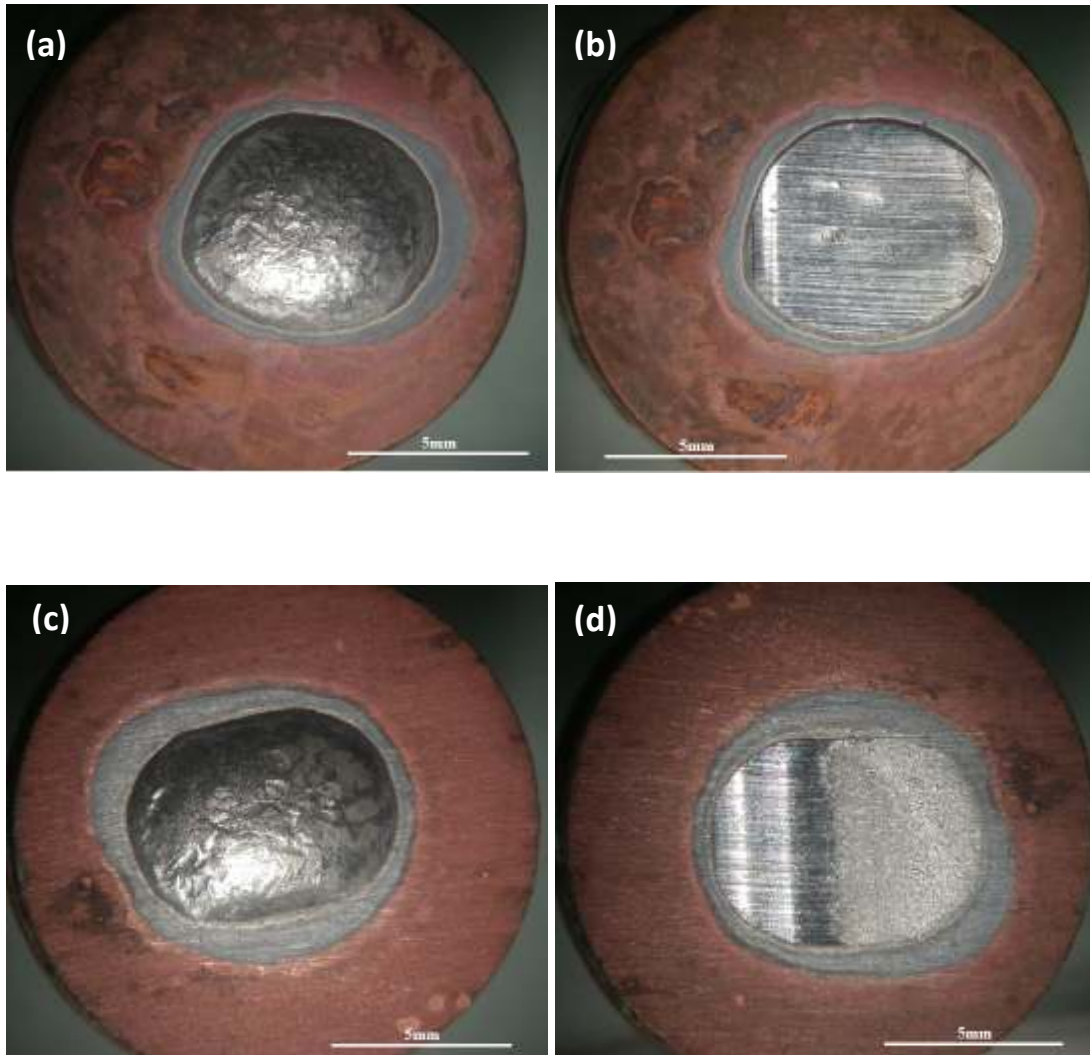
Macroscopic images (top view) of stabilized Sn-3Ag-0.5Cu solder on (a) smooth copper surface (c) rough copper surface. Macroscopic images (top view) of sheared Sn-3Ag-0.5Cu solder on (b) smooth copper surface (d) rough copper surface.
